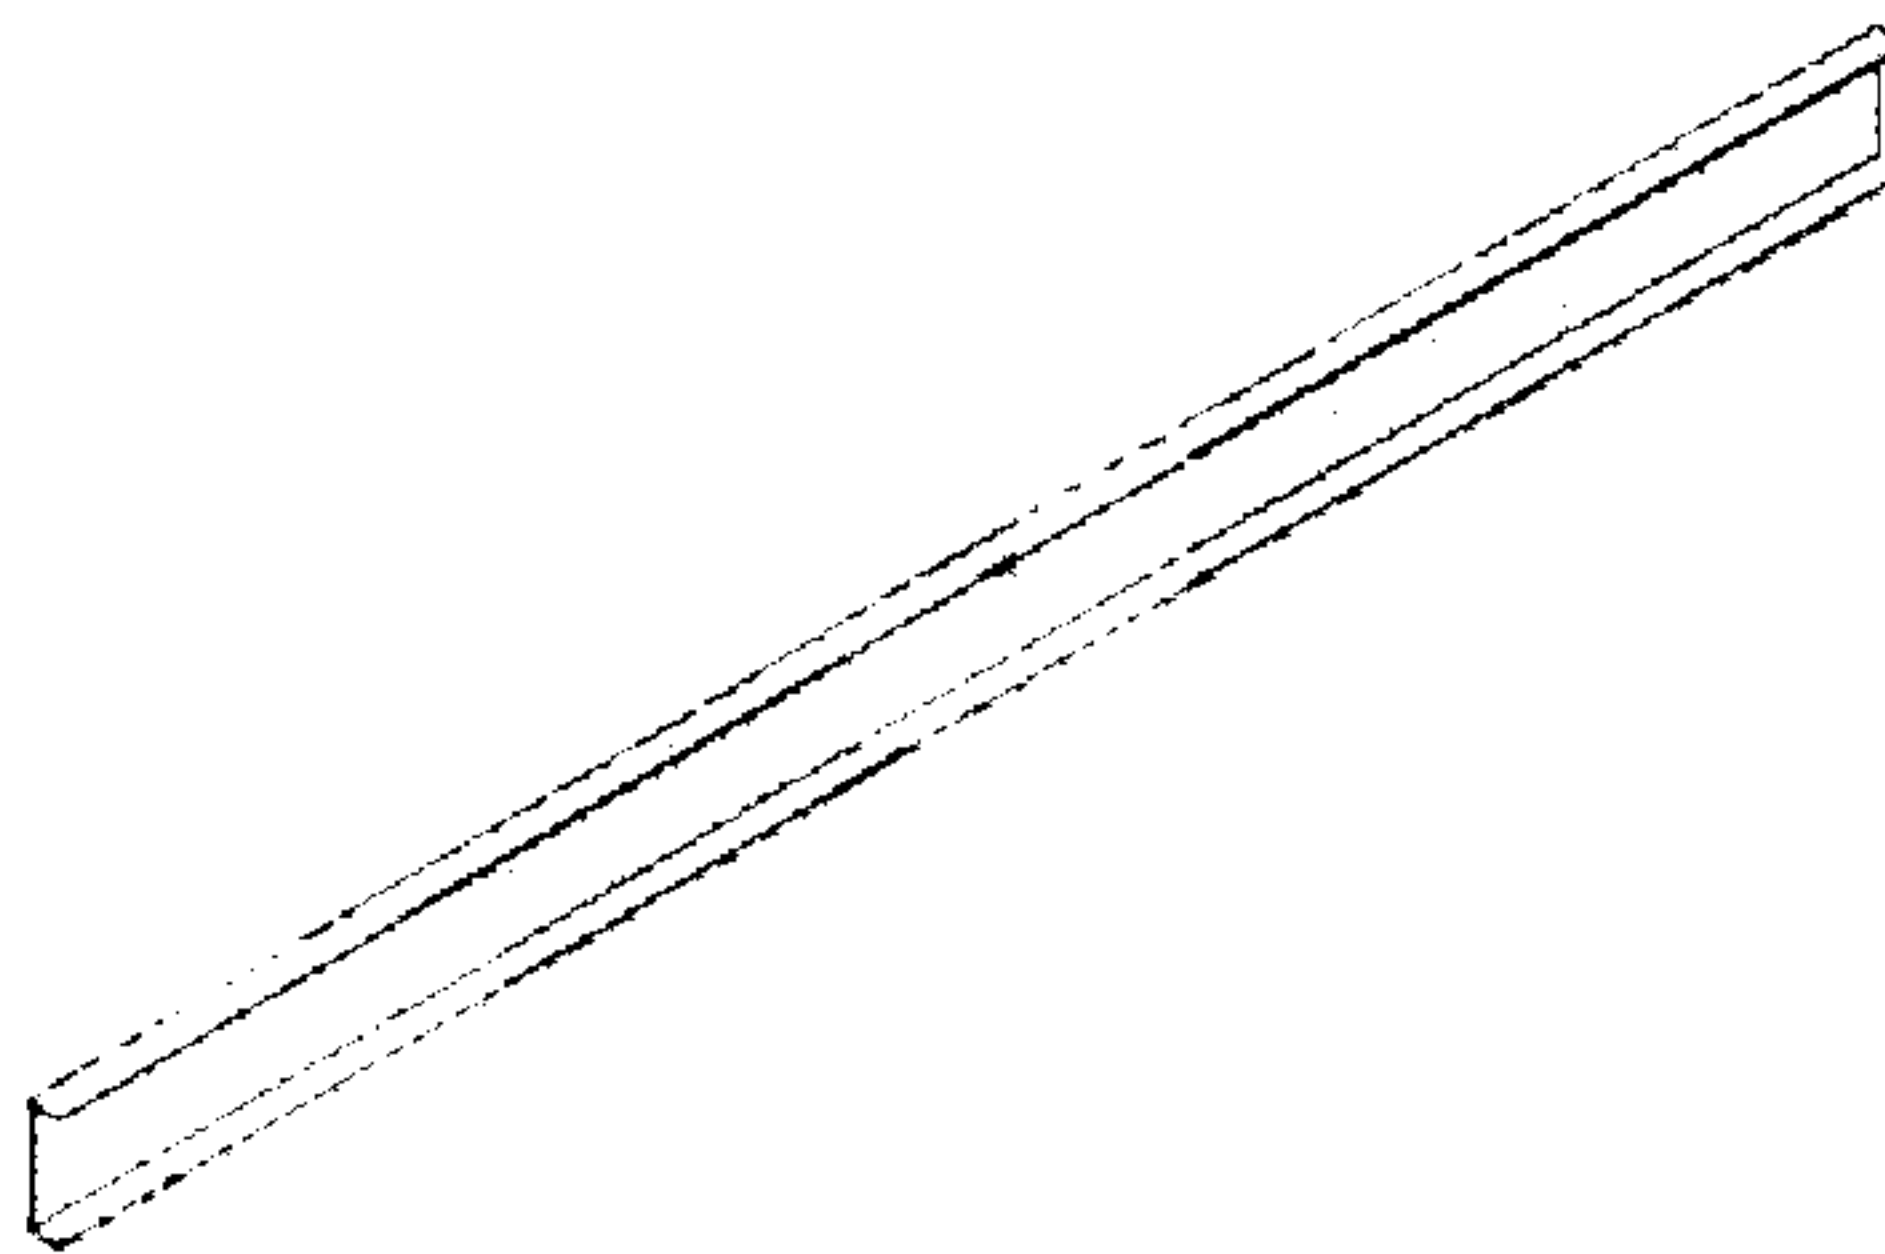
Steel sheets bent into C-channel bar to make fin
